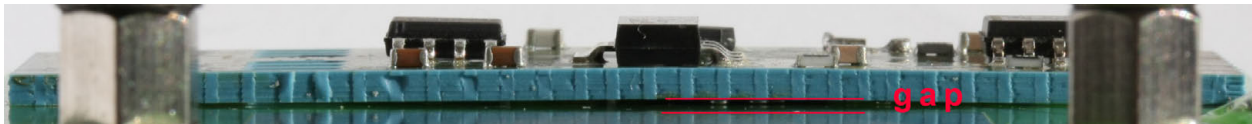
Side view of integrated sensor mounted on PCB depicting convex sensor bending. Note the gap in the middle, which yields a camber of ~ 0.4 mm.
